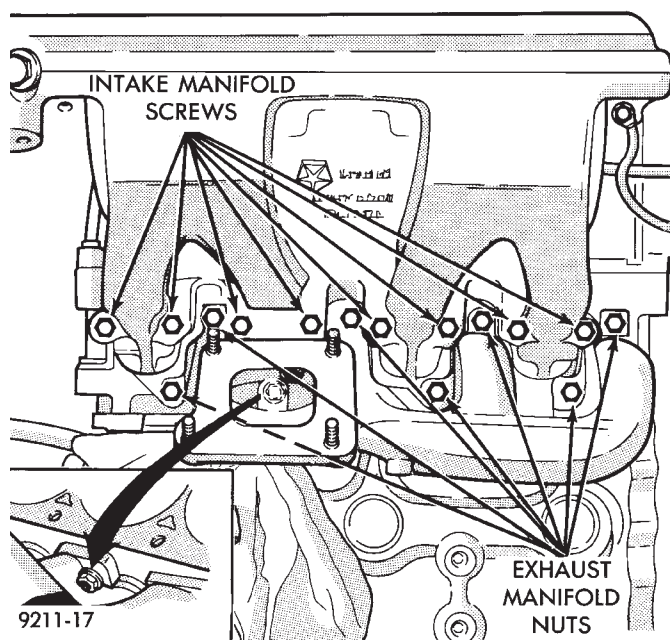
Intake and Exhaust Manifolds—Turbocharged Engines
